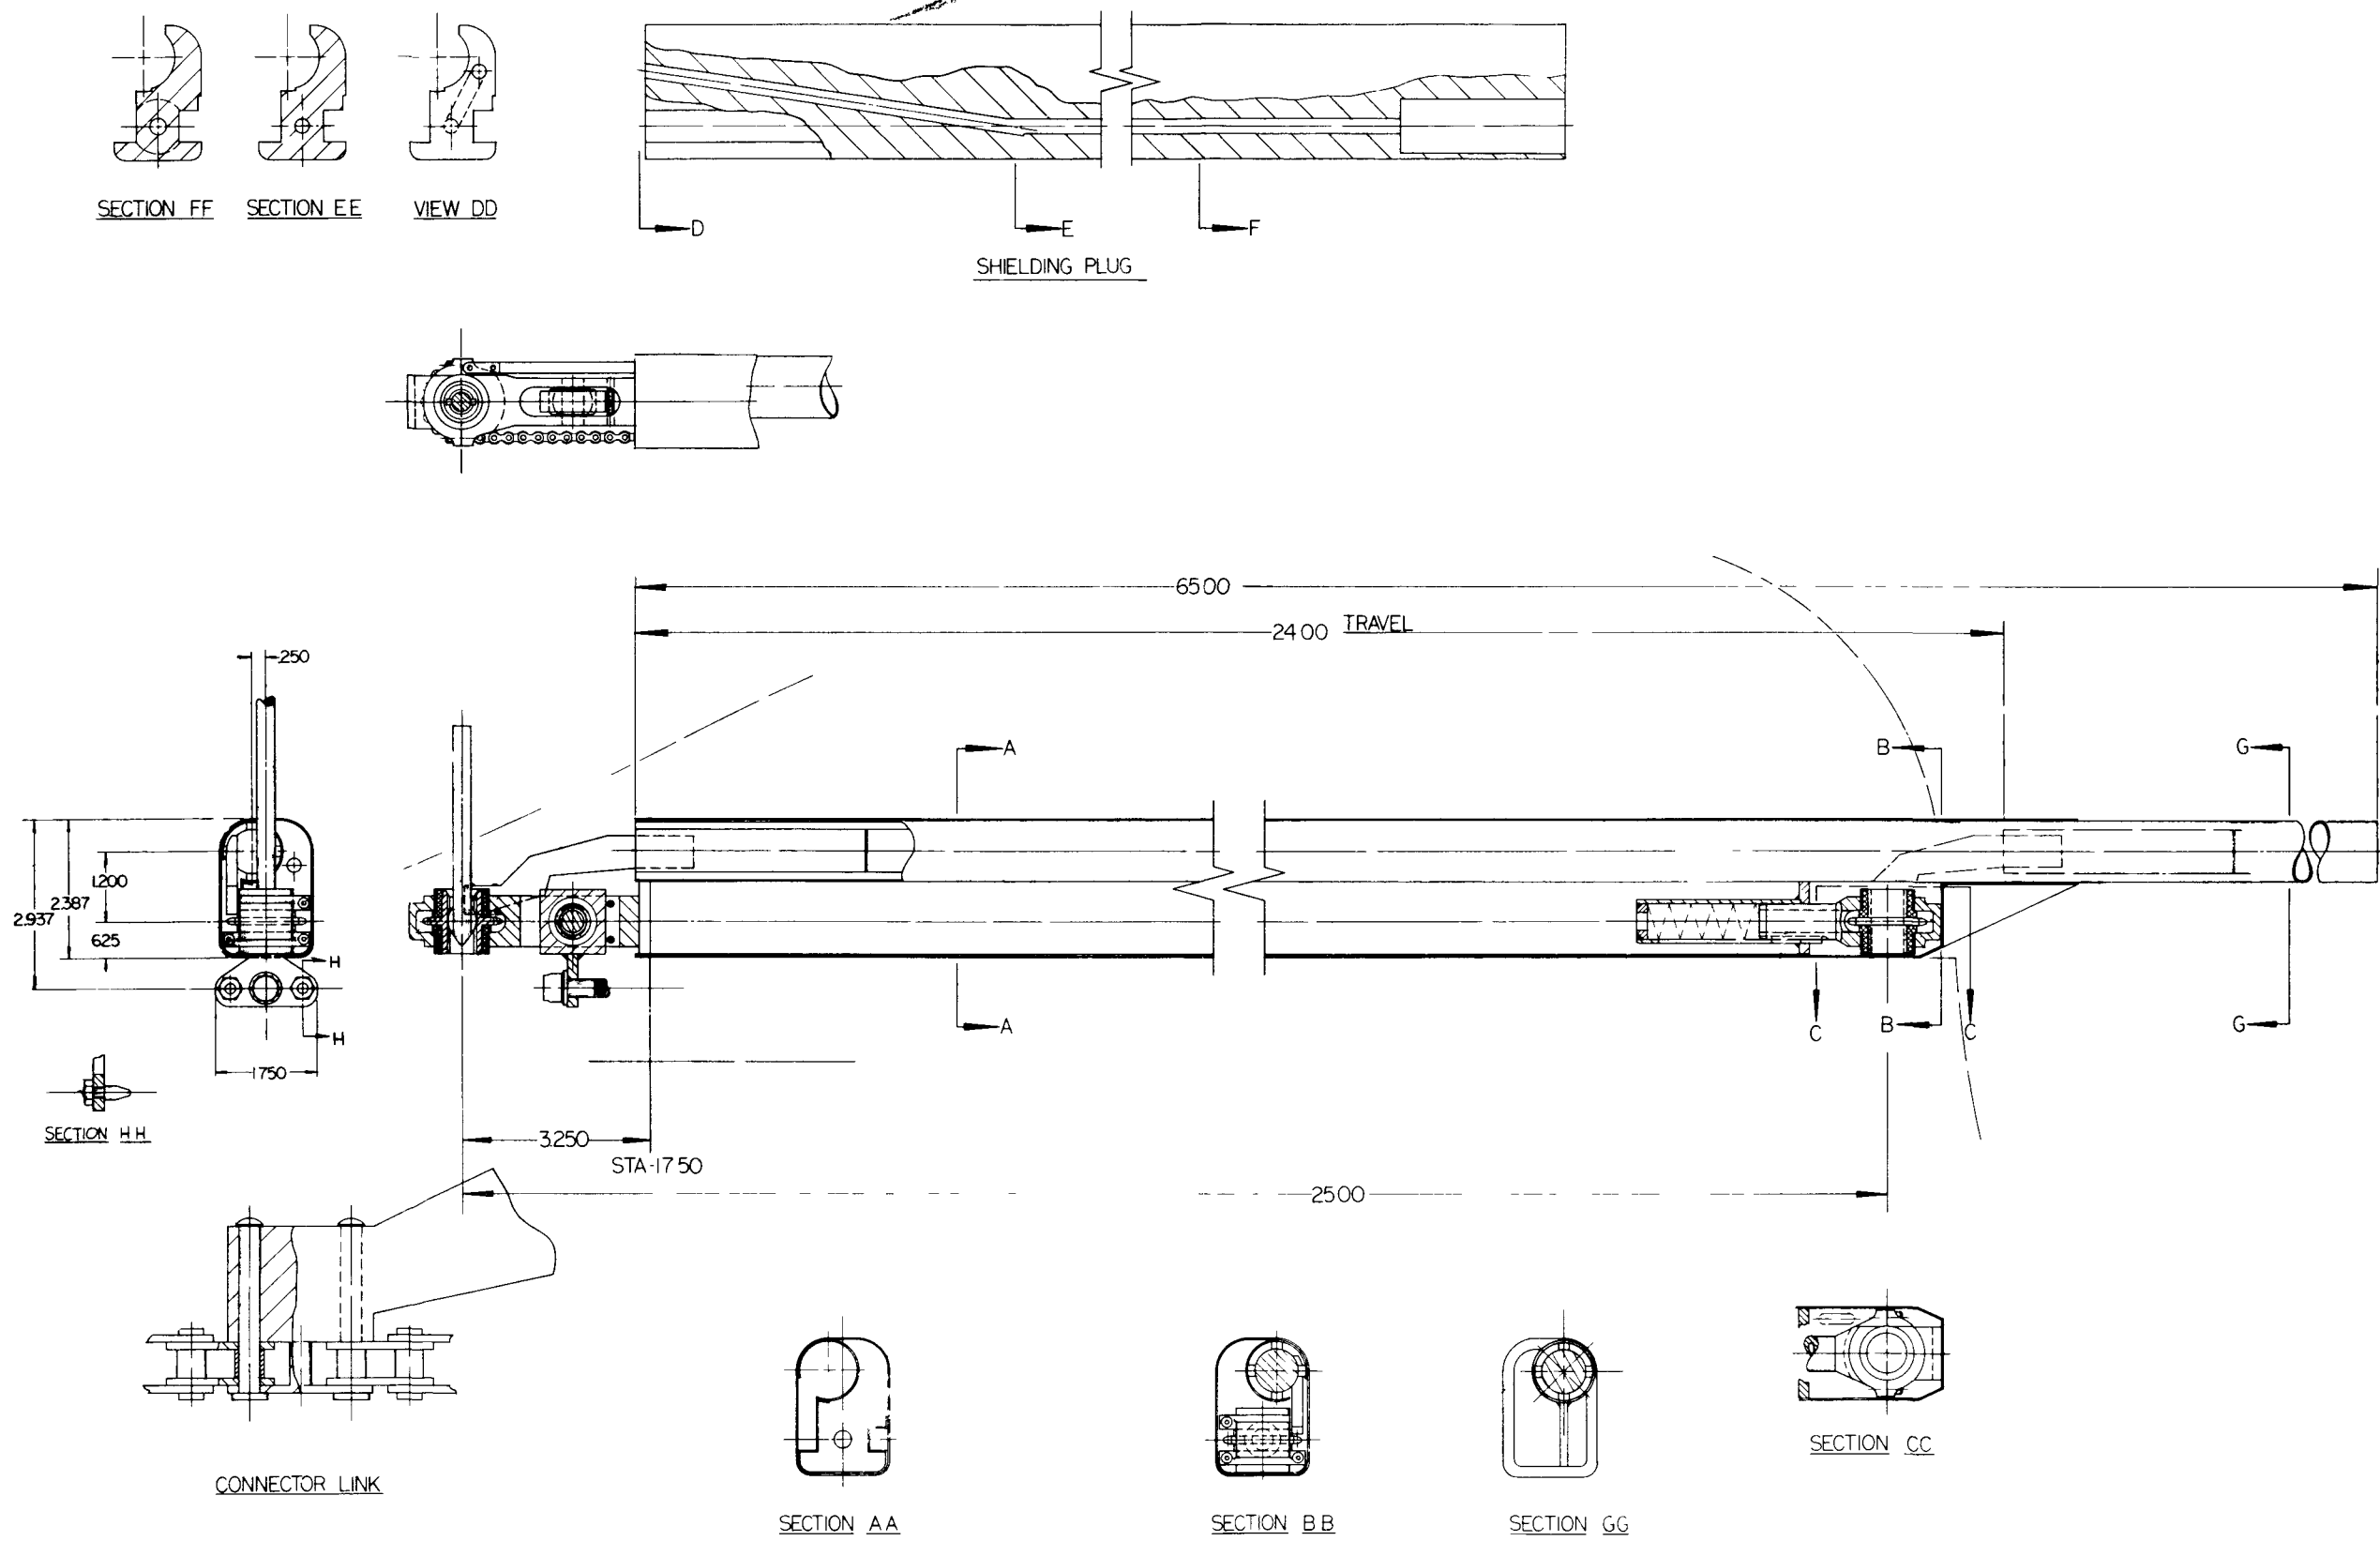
Experimental chain drive assembly (Dwg. 628E977)
